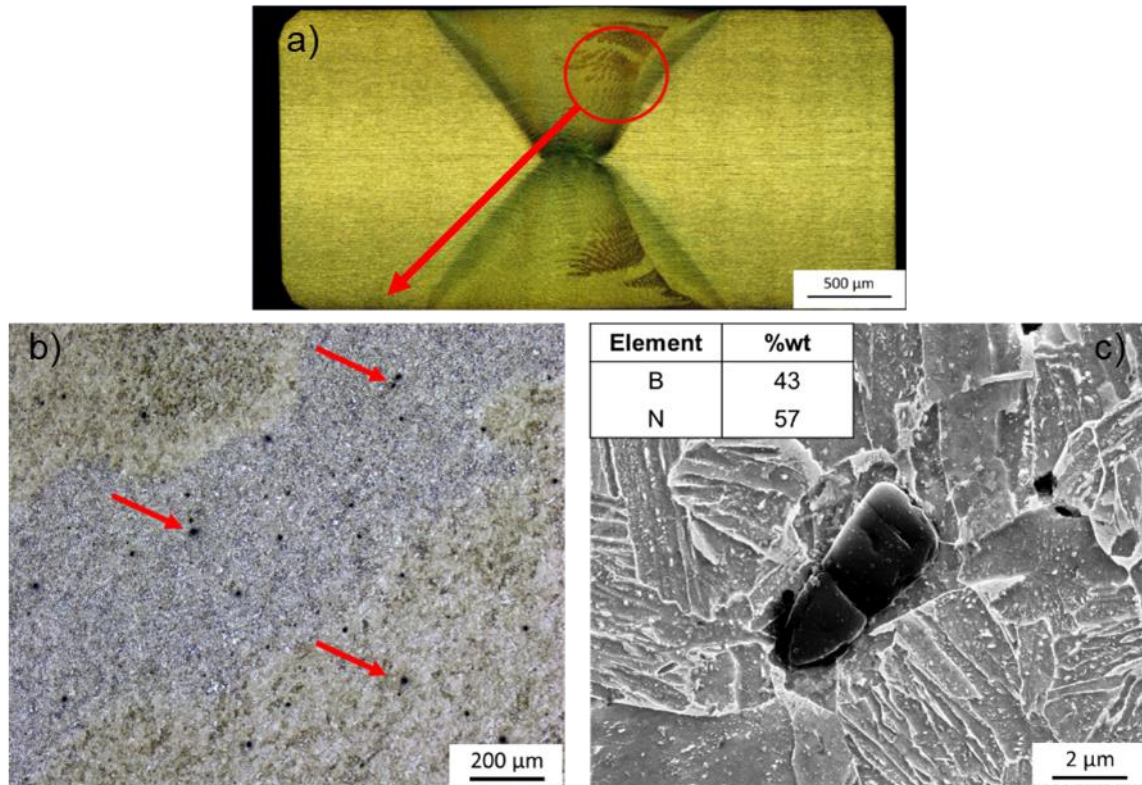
a) macro-etch of a cross-section of API X-70 grade pipeline steel produced with a welding tool after 60 plunges; b) Concentrated particles found at the advancing side portion of the stir zone, coinciding with the hard zone; c) Morphology and composition of a tool fragment inserted due to welding tool wear. The red circle indicates the hard zone; the red arrows indicate contamination particles
